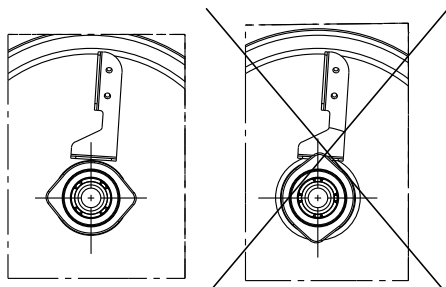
Fitting the stationary shaft seal part (only SiC/SiC)
